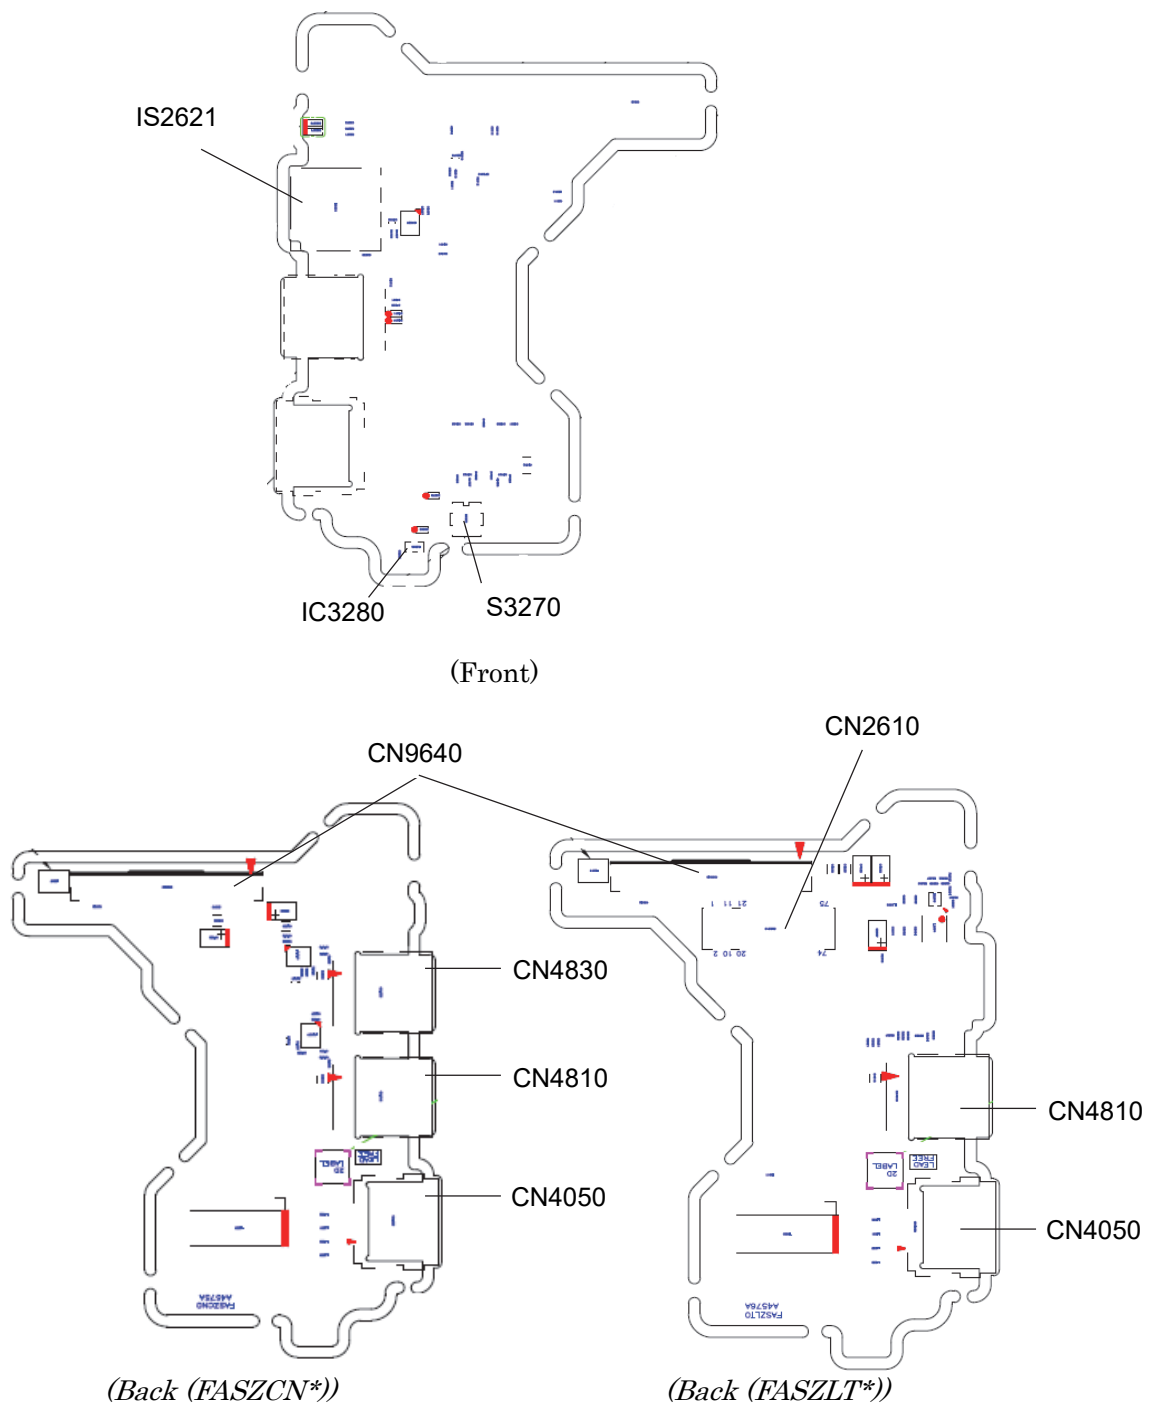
USB board (FASZCN*/FASZLT*) layout
